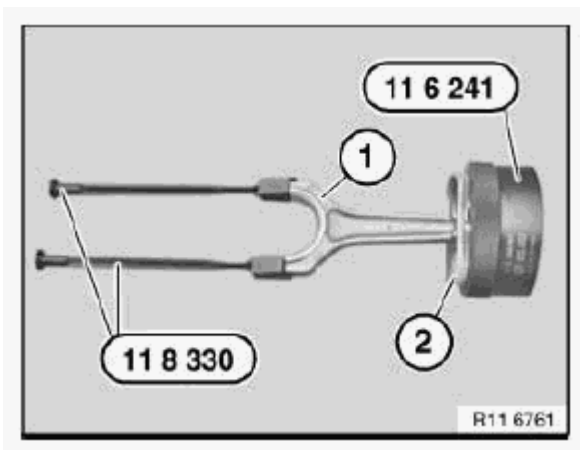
Connecting Rod, Piston And Special Tools (11 8 330) And (11 6 241)
